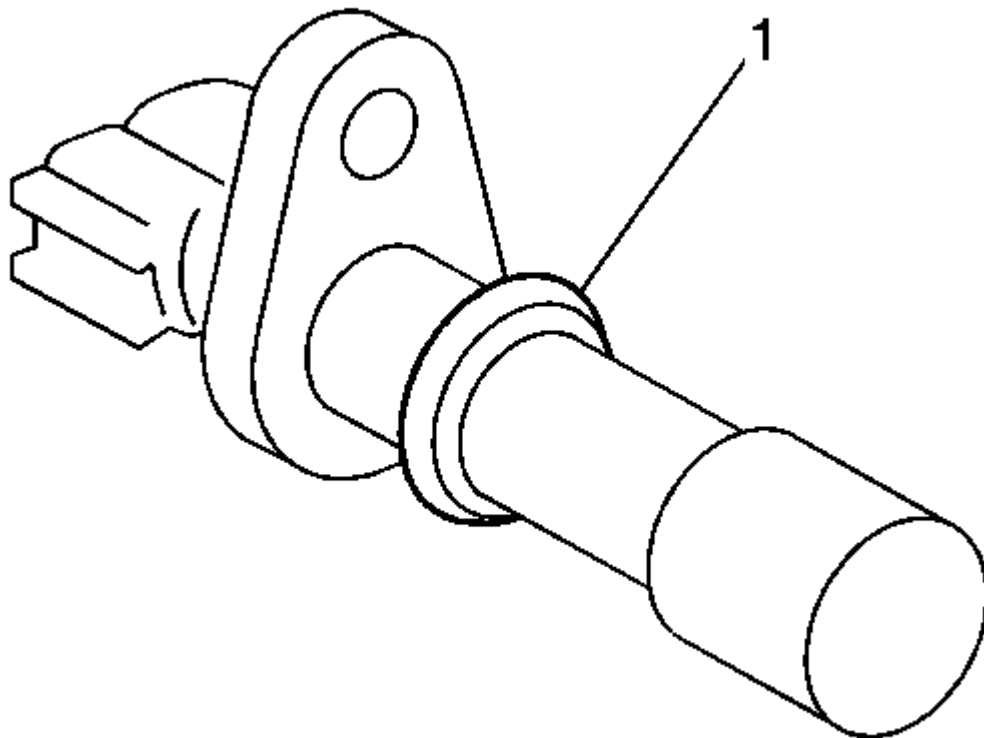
View Of Crankshaft Position Sensor & O-Ring
